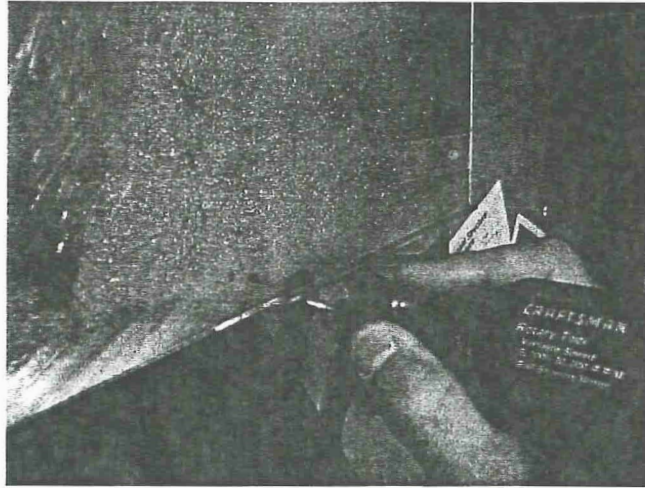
The top “rails” were removed using a rotary tool, files and sandpaper.
